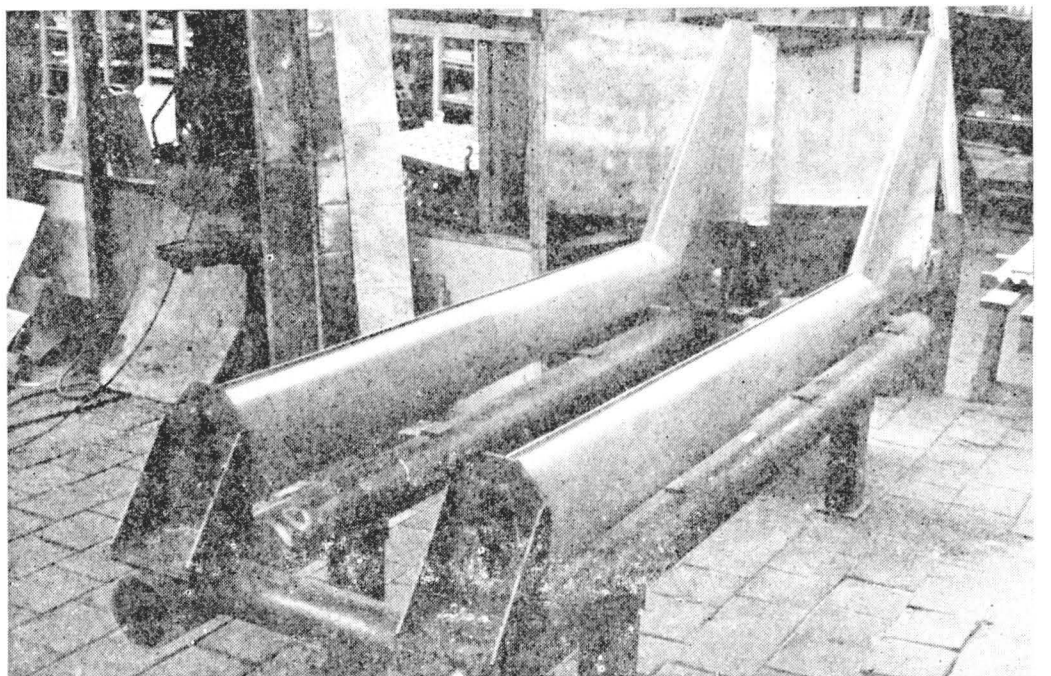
Final assembly jig for the fins and tail booms; although generally symmetrical, the access doors to the controls and the tail plane fittings make the parts handed, so that two jigs are required
